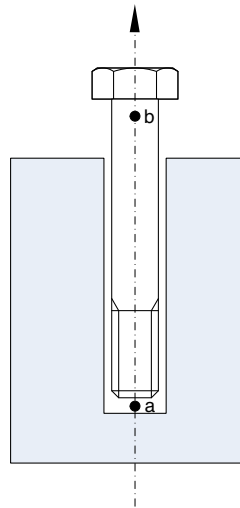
Points *a* and *b* on the center line of the bolt and bolt-hole assembly.
